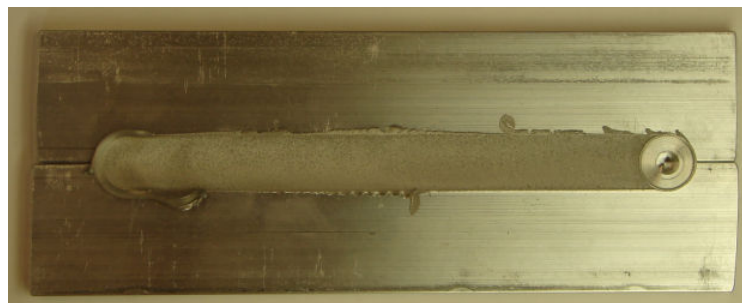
Weld sample using force control via traverse speed.
